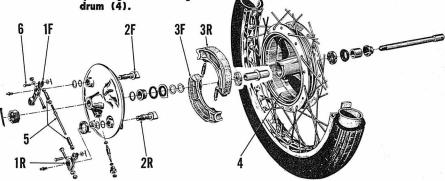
Exploded view of dual cam (full self-energizing) front brake assembly. This type is used on rear on some models. Front lever (1F) is actuated by hand control lever and turns cam (2F) expanding brake shoe (3F). Rod (5) connects the two levers together so that rotation of lever (1F) will also rotate lever (1R).
